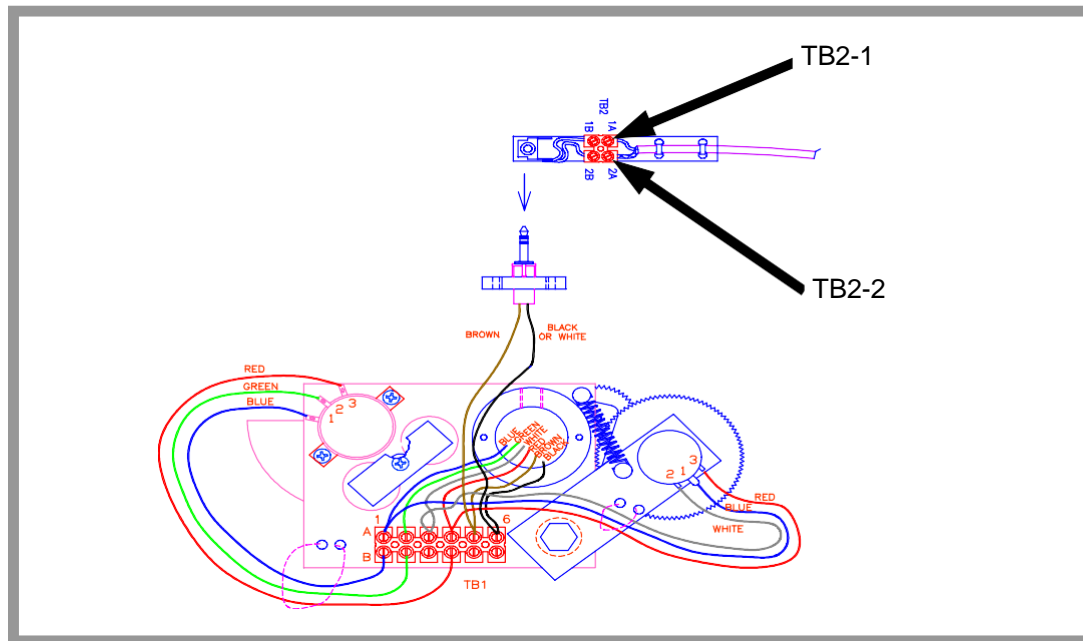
SENSOR ASSEMBLY WIRING AND SLIP-RING
